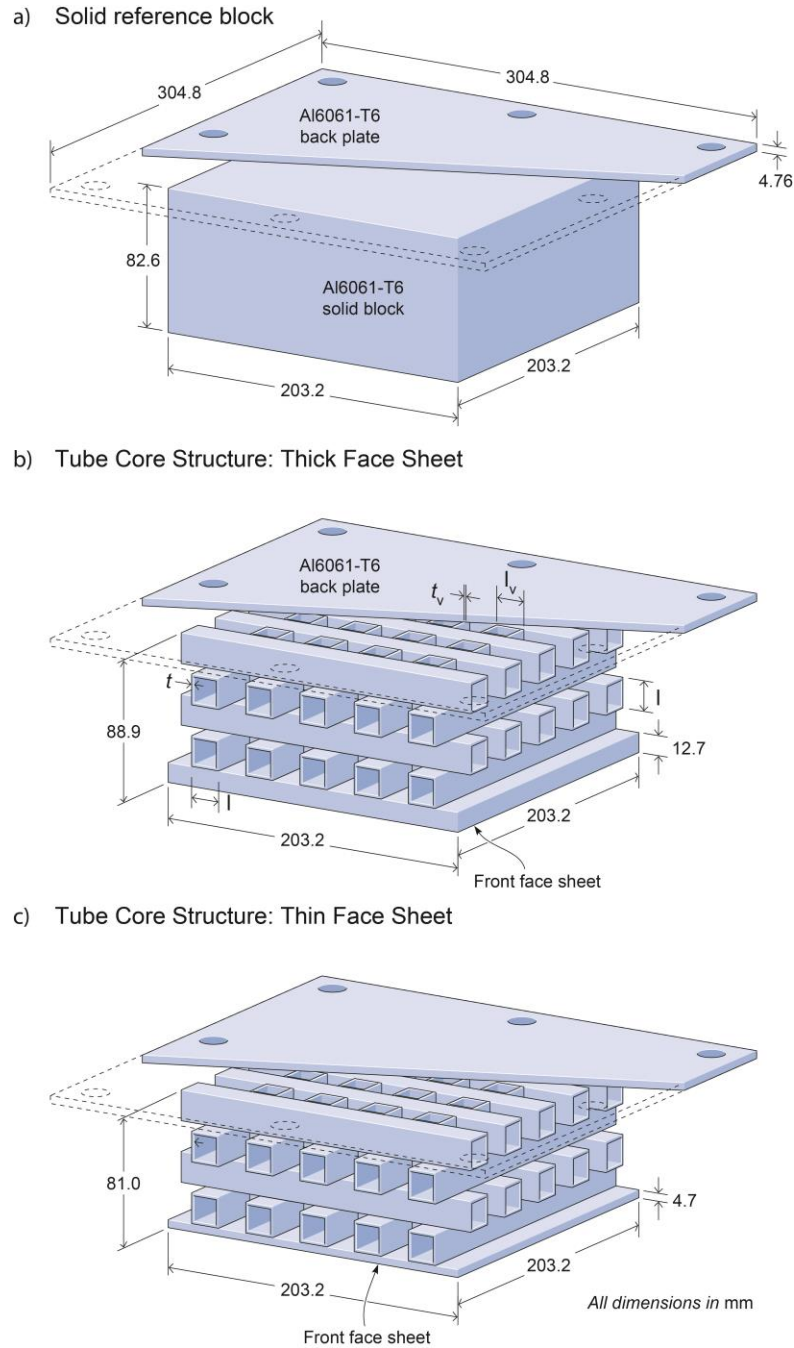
The back-supported test structures used for the sand impact loading experiments. (a) Solid Al6061-T6 reference block welded to 4.76 mm thick plate. The hole pattern on the back face sheet provided a means to bolt the specimen to the vertical impulse test apparatus. (b) The Al6061-T6 3D tube cellular structure with 12.7 mm thick front face and (c) the same cellular structure with a 4.7 mm thin front face.
